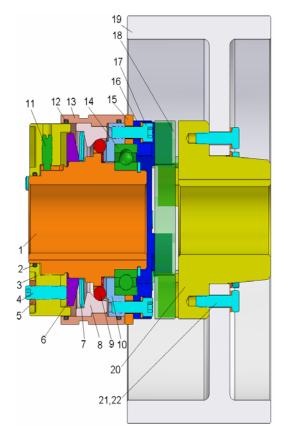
General view of the assembly comprising the overload coupling with elastic coupler with brake washer
